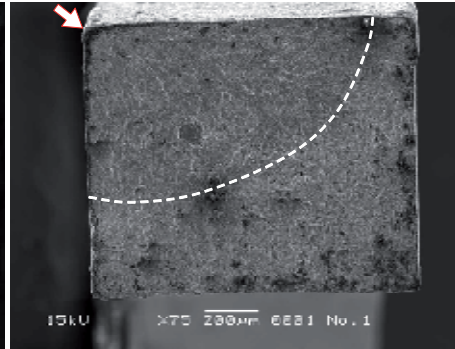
SEM photograph of fracture surface for cast SMA in pulsating-plane bending fatigue
